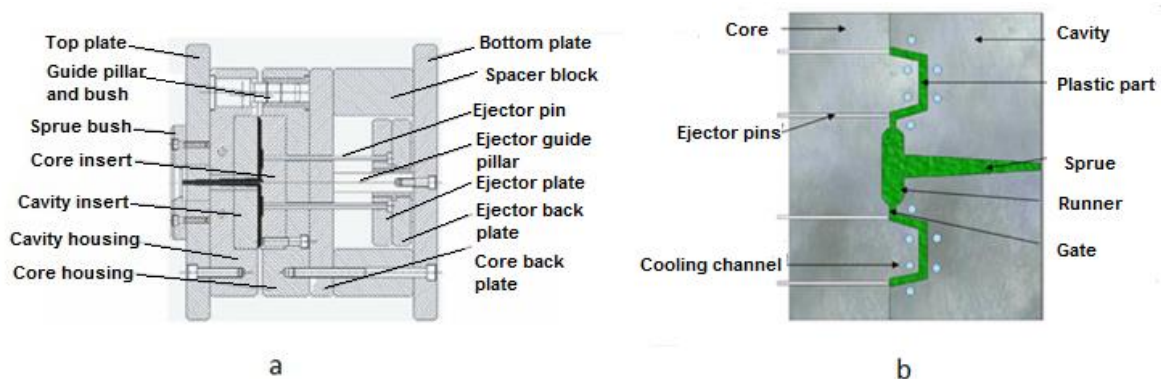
Typical construction of an injection mould (a) and basic injection mould unit (b) [34 & 35]
